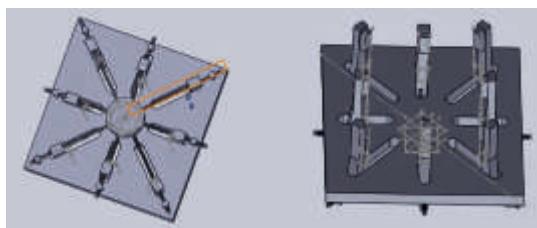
Plan views (left) and assembled view of Modular Fixture robot (right)
